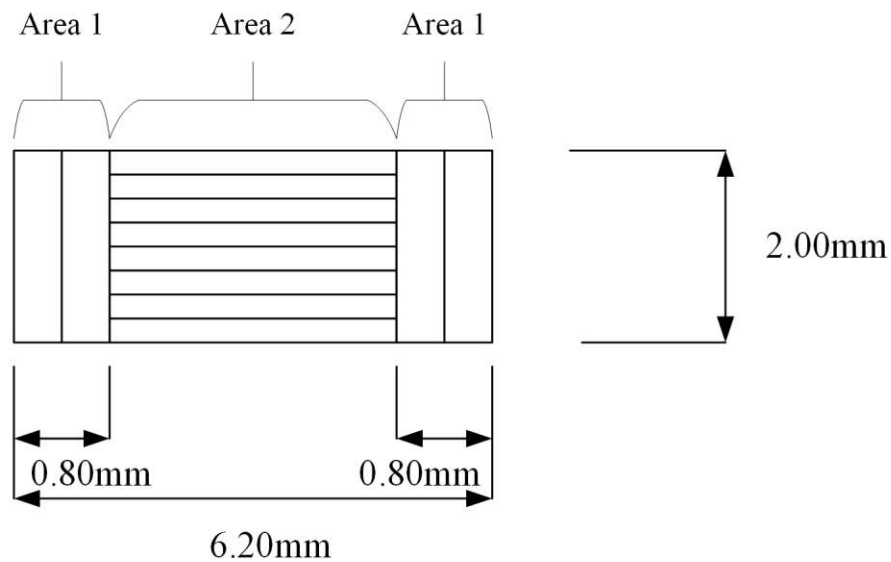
Test sample cross-section schematic. Area 1 exterior shell structure Area 2 internal laminate structure
